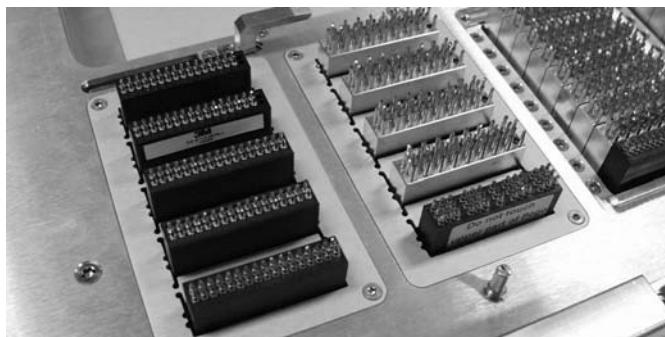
ATE to test fixture connection through a pogo pin assembly. (Courtesy of Verigy.)
